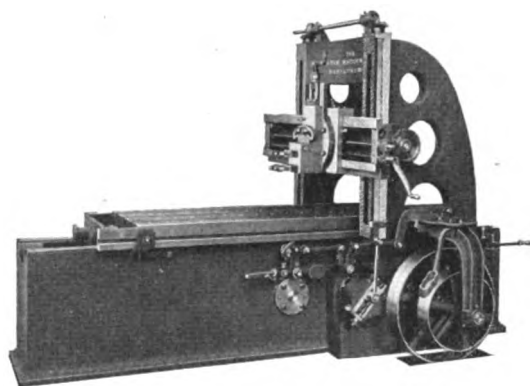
"Hamilton" 24x24-Inch Spur-Gear Planer with One Head
